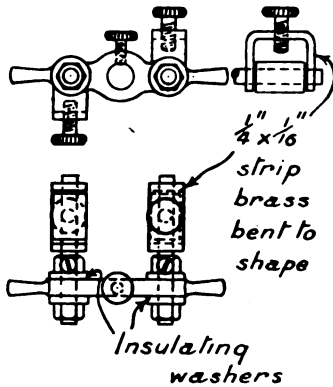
SKETCH SHOWING DETAIL OF BRUSH ROCKER. (Full size.)
